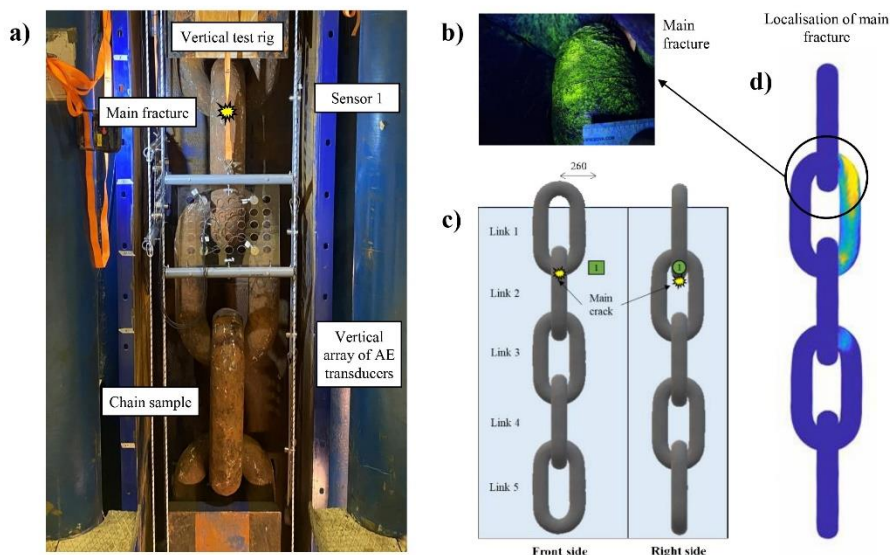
(a) Instrumented test rig and vertical array of transducers. (b) Main fracture inspected using MP testing. (c) Schematic of sensor arrangement. Dimensions in mm. (d) AE-based DT showing localisation of main fracture [87].
